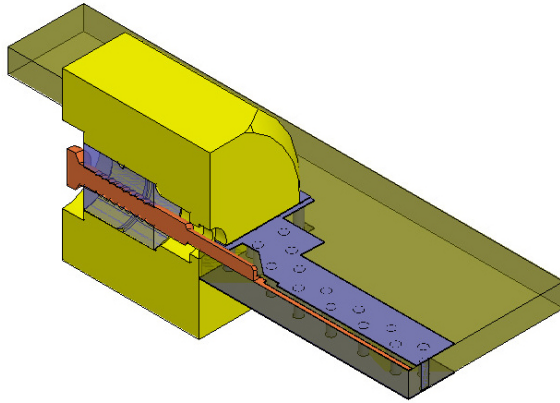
Section drawing of the MMPX connector inserted in the cut-out of the PCB.
